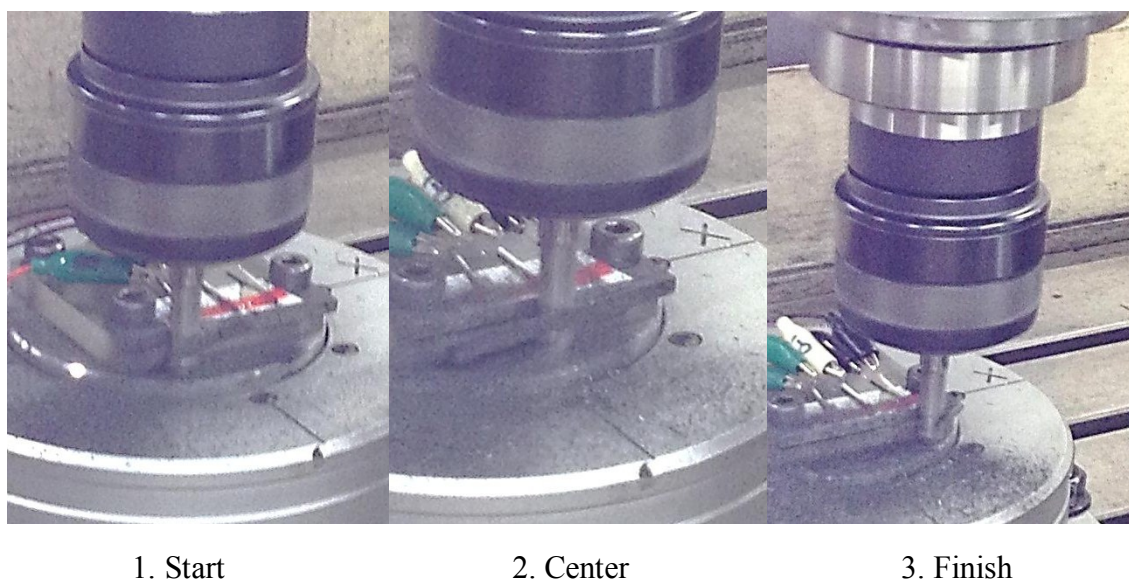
State of milling of the Material A (Machined with Tool No.1: Helix angle 0°) (Up cut method)
